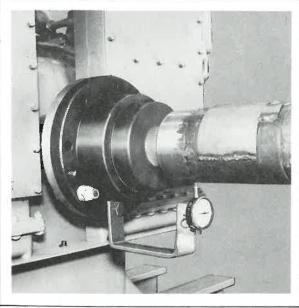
CHECKING ALIGNMENT BETWEEN DRIVESHAFT AND COMPRESSOR.
